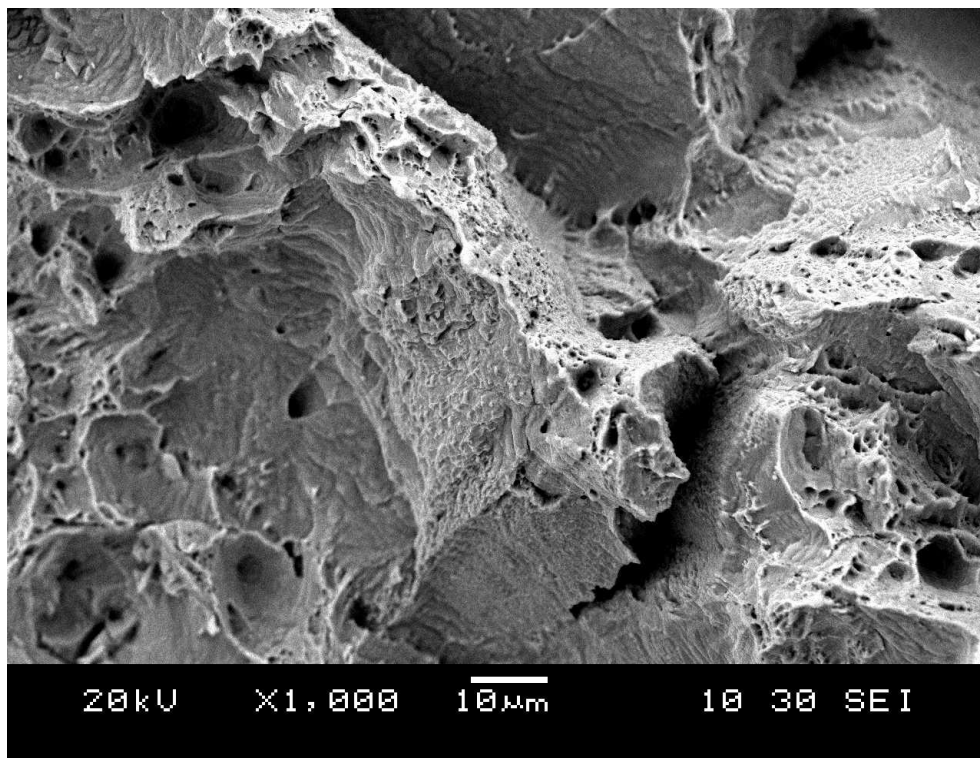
Fatigue fracture surface of IN601 in 3.5% NaCl solution at pH = 7.0
